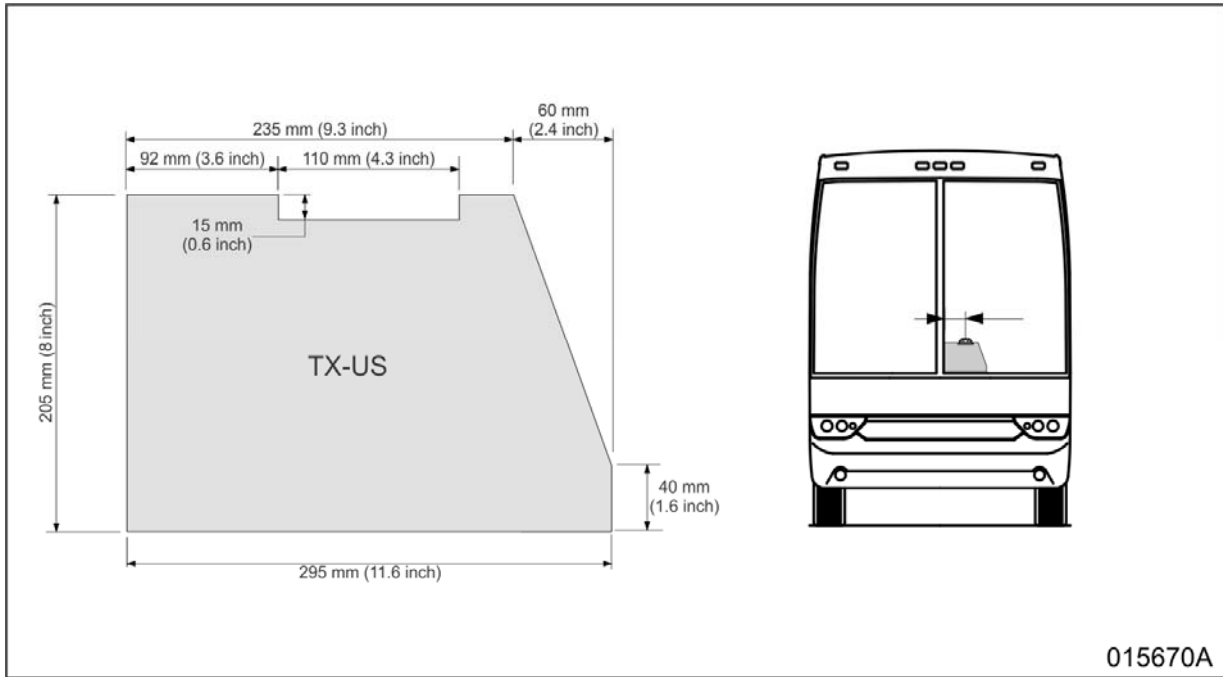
Dimensions of self-fabricated cardboard template to position the LDW2 camera at the inside of the windshield
